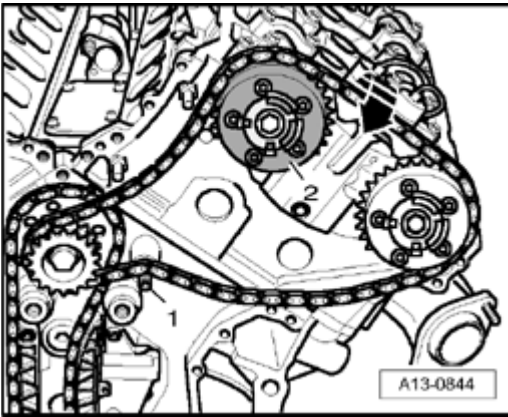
Removing Pivot Pins & Timing Chain For Cylinder Bank 1 (Right), Beginning At Intake Camshaft Adjuster
